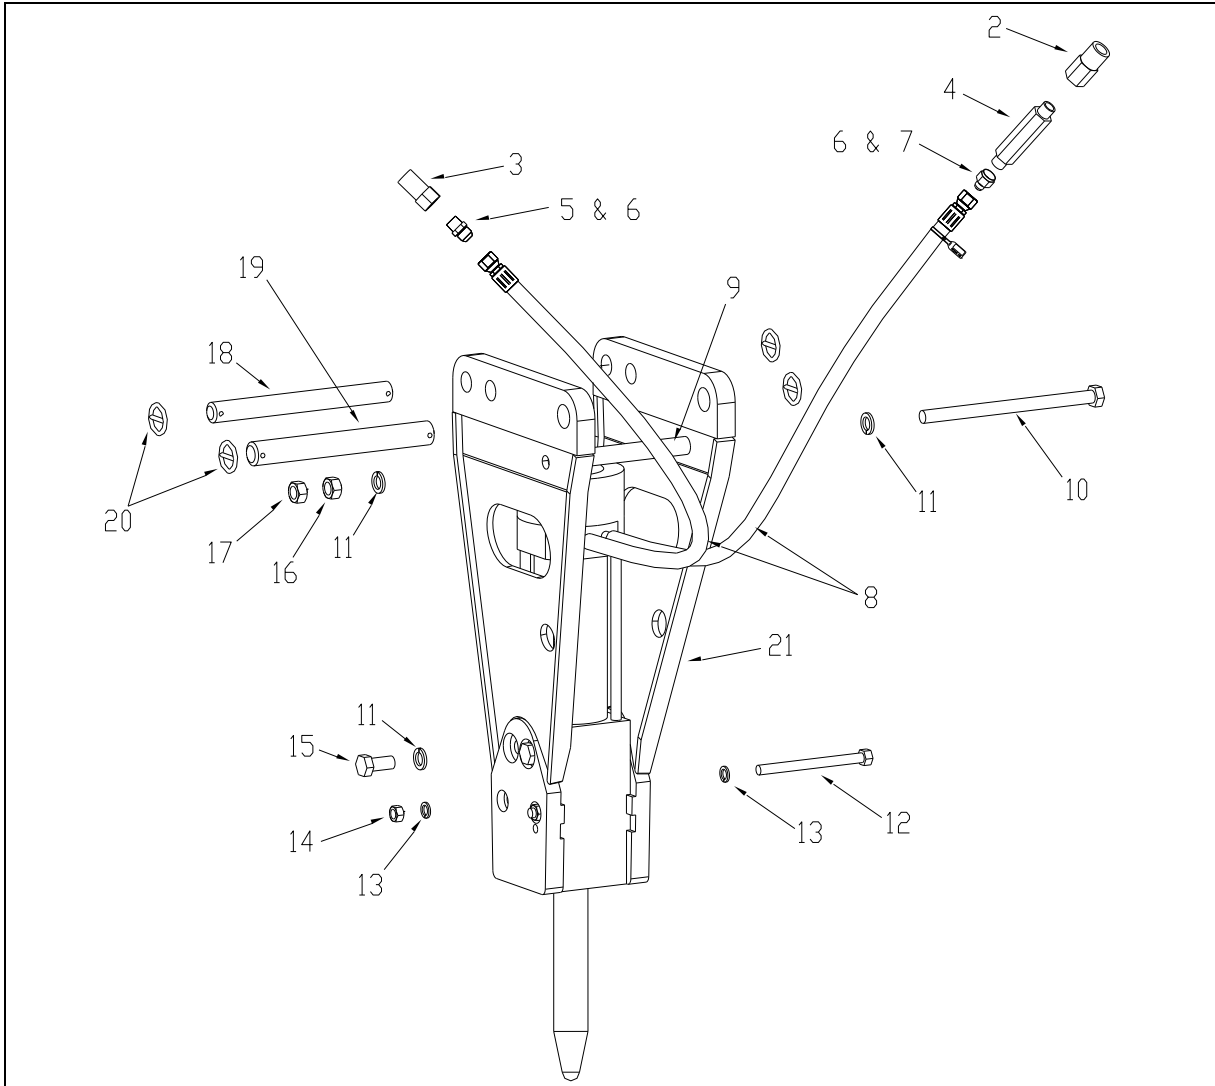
Hydraulic Components & BSF Housing Plates – Model AR70C
